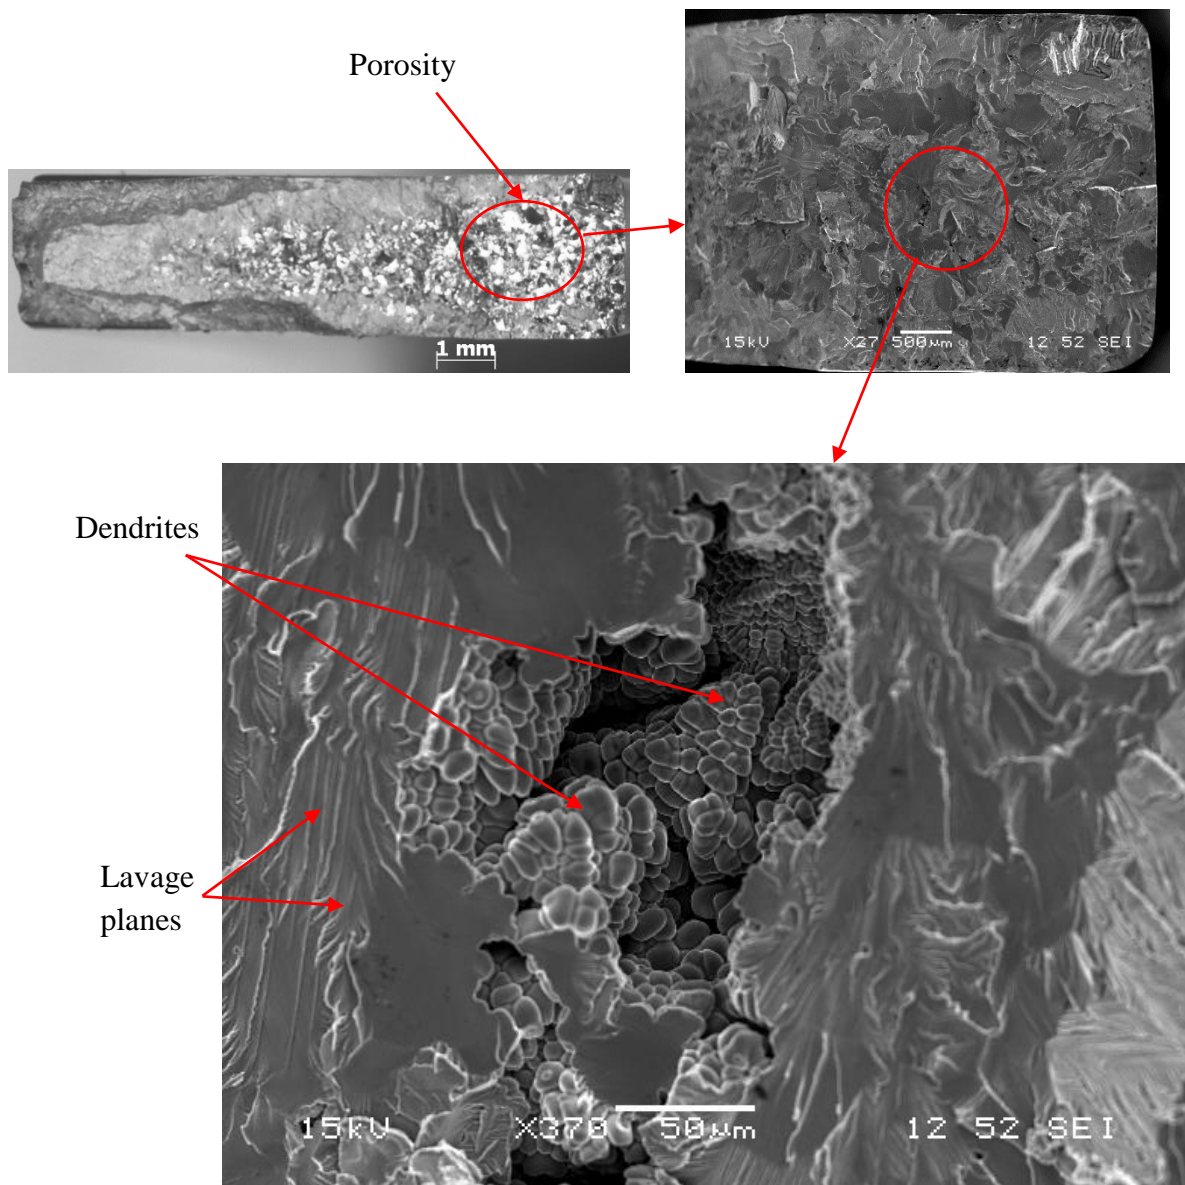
Typical fracture surface observed at a weld start/stop position; significant porosity is present.
